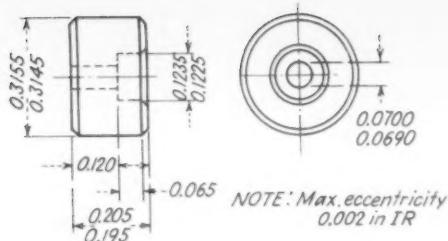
Drawing of an electric clock motor bearing made from 90-10 bronze powder. Part requires final sizing.
